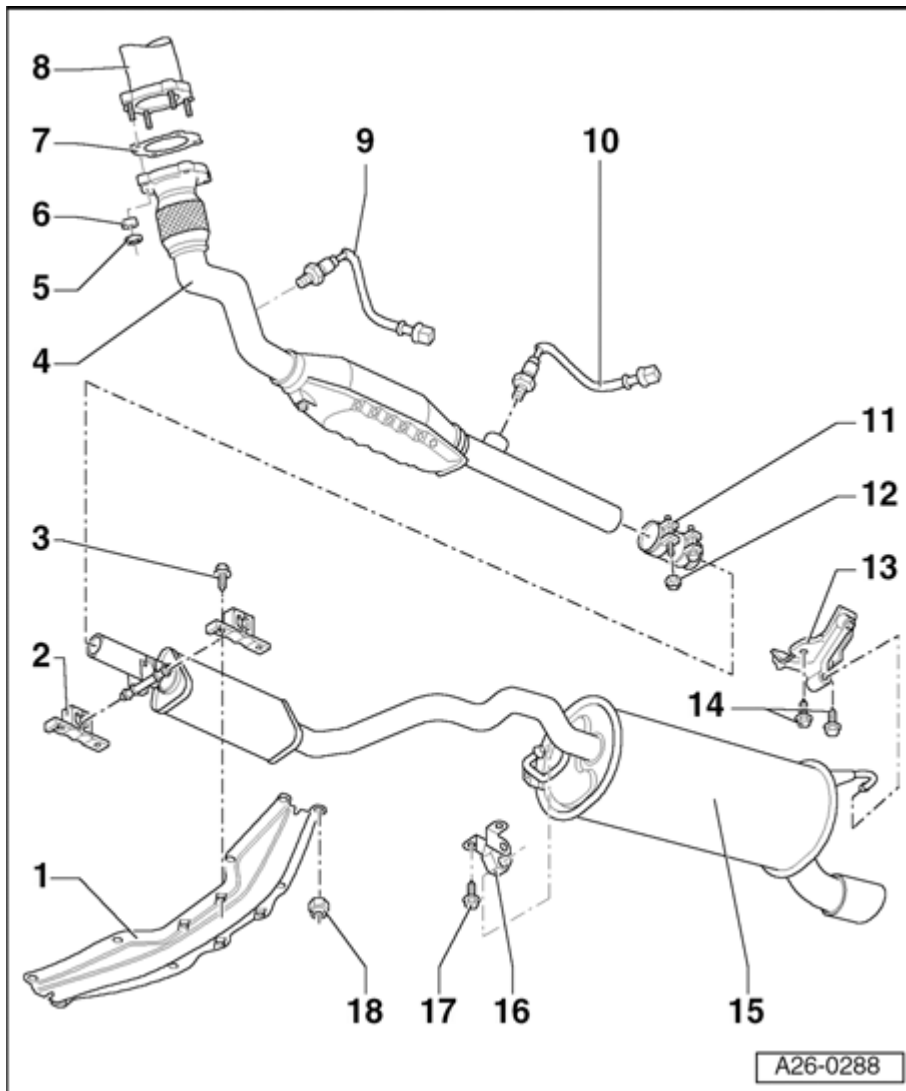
Exhaust System, Vehicles With Front Wheel Drive Remove/Install Components
